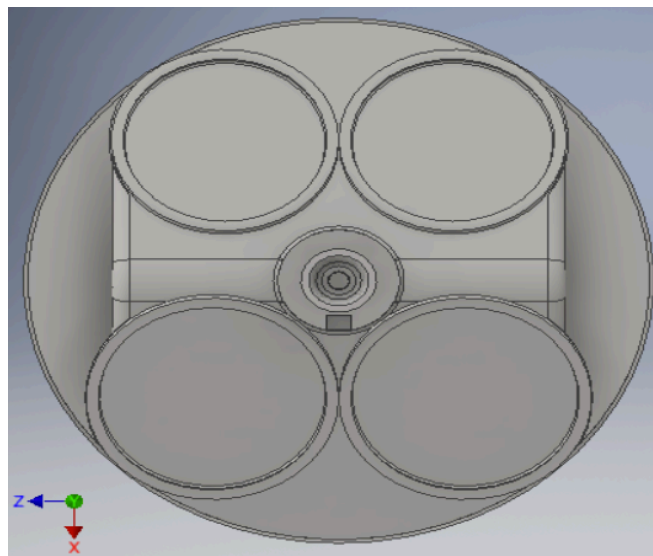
1KR-FE Engine's combustion chamber (designed in Autodesk Inventor 2016).
